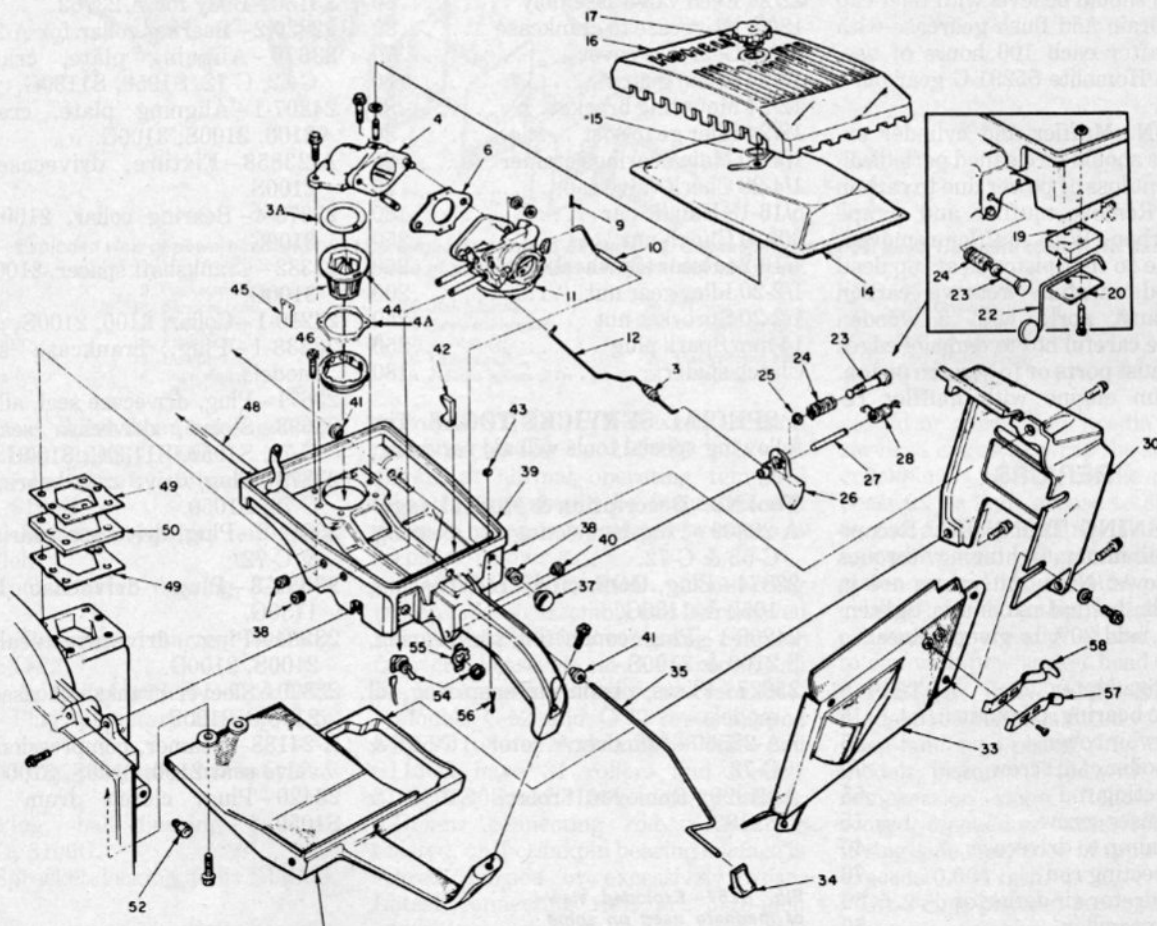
Exploded view of typical air box and throttle assembly used on Models 2100, 2100S and 3100G. Compression release and throttle lock mechanism is shown in inset at upper right. Early models did not use gaskets (3A and 4A); do not install gaskets on early models unless a new intake manifold is also installed.
